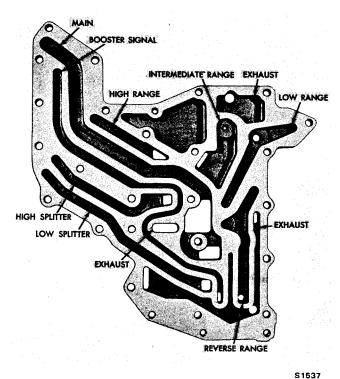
Inner side of oil transfer plate (5660, 5860)—oil passages
